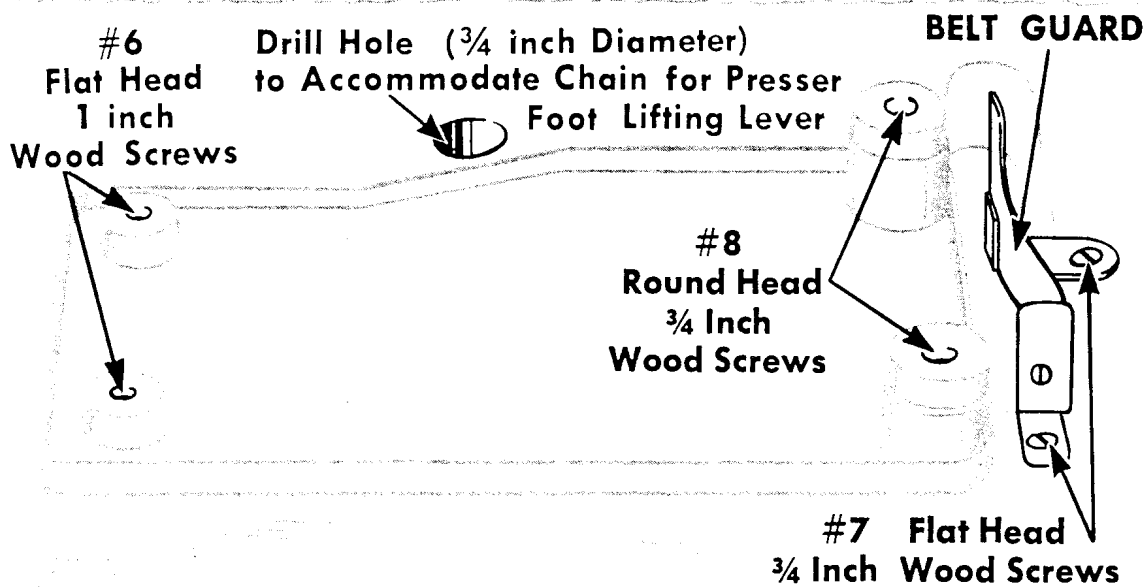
Machine Base on Table, Showing Position and Drill Sizes of Holes Required for Installation
